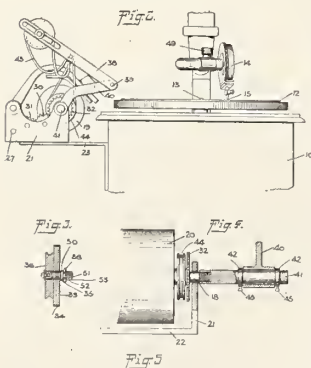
is a perspective view of a machine constructed and arranged in accordance with the present invention; Fig. 2 is a front view of a machine constructed and arranged in accordance with the present invention; Fig. 3 is a detail view, on an enlarged scale, showing in vertical section the friction-driven wheel of the transmission gear employed in the present invention; Fig. 4 is a detail view, on an enlarged scale, showing an end fragment of a cylindrical record and the fixed shaft
